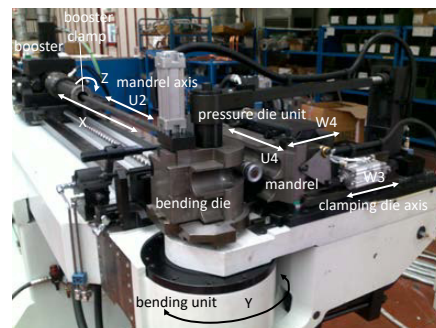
electric-hydraulic tube-bending machine with the main units and axes
